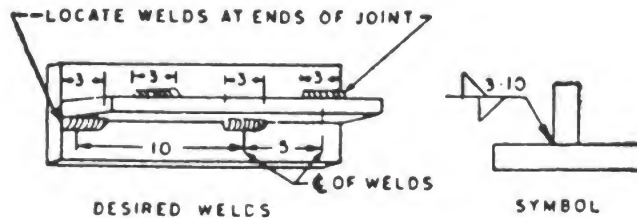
Length and pitch of increments of staggered intermittent welding.
